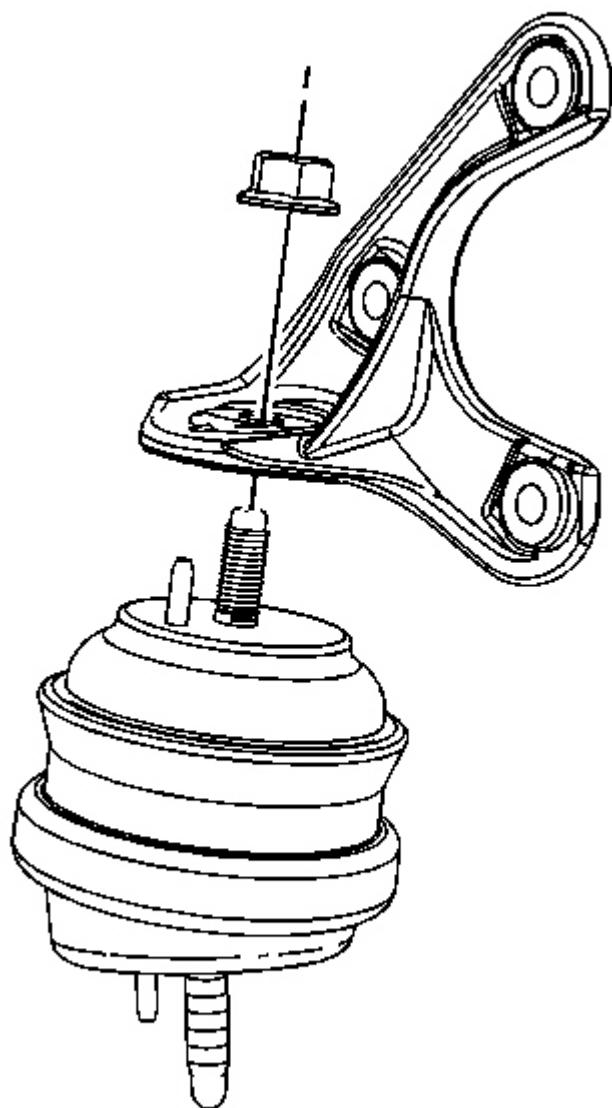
Removing/Installing Rear Engine Mount To Bracket Nut
